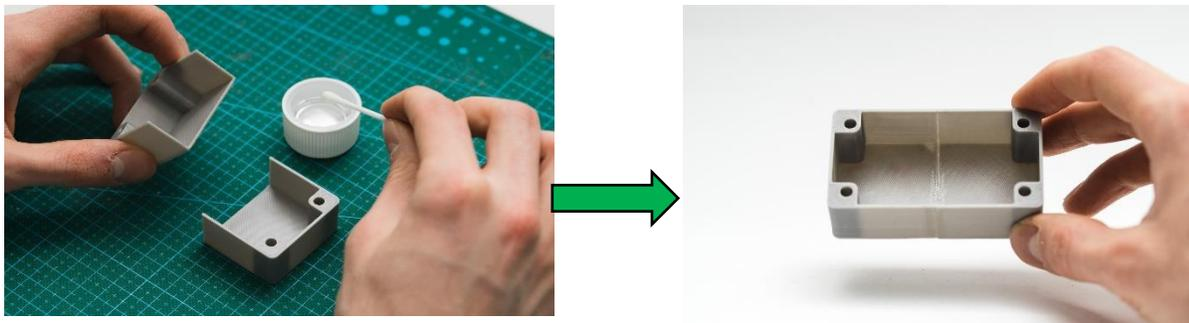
Two grey ABS print halves attached together by cold welding
